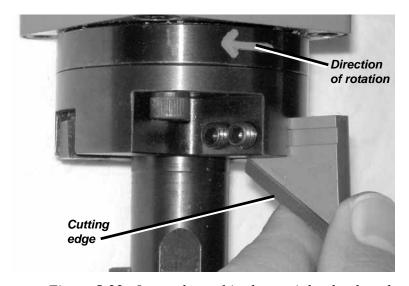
Insert the tool in the straight-shank tool slot, with the cutting edge in the direction of rotation.
